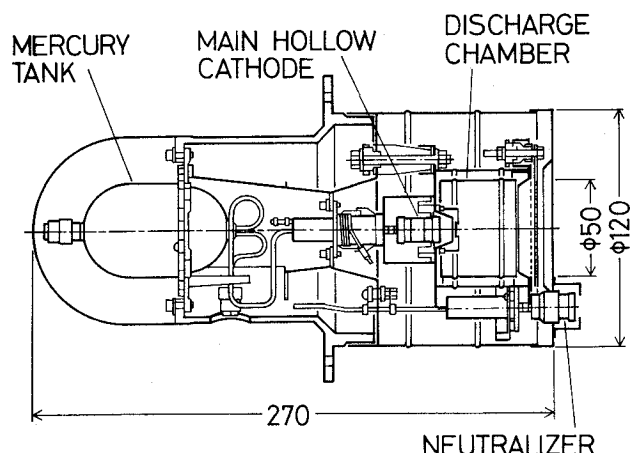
Longitudinal section drawing of the thruster (dimensions in millimeters).
